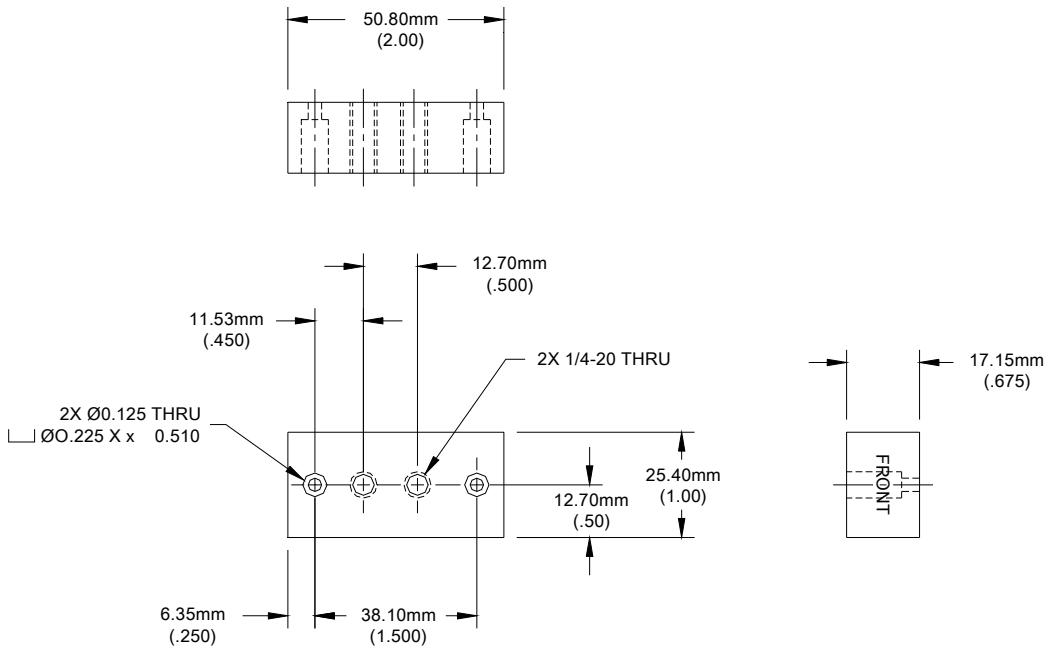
HEBMA-4 — Mounting Block Adapter (HE 15 to HE 1515)
